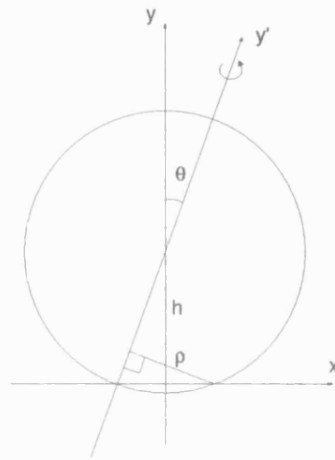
A diagram of tool pressed against the workpiece with tilted rotation axis
